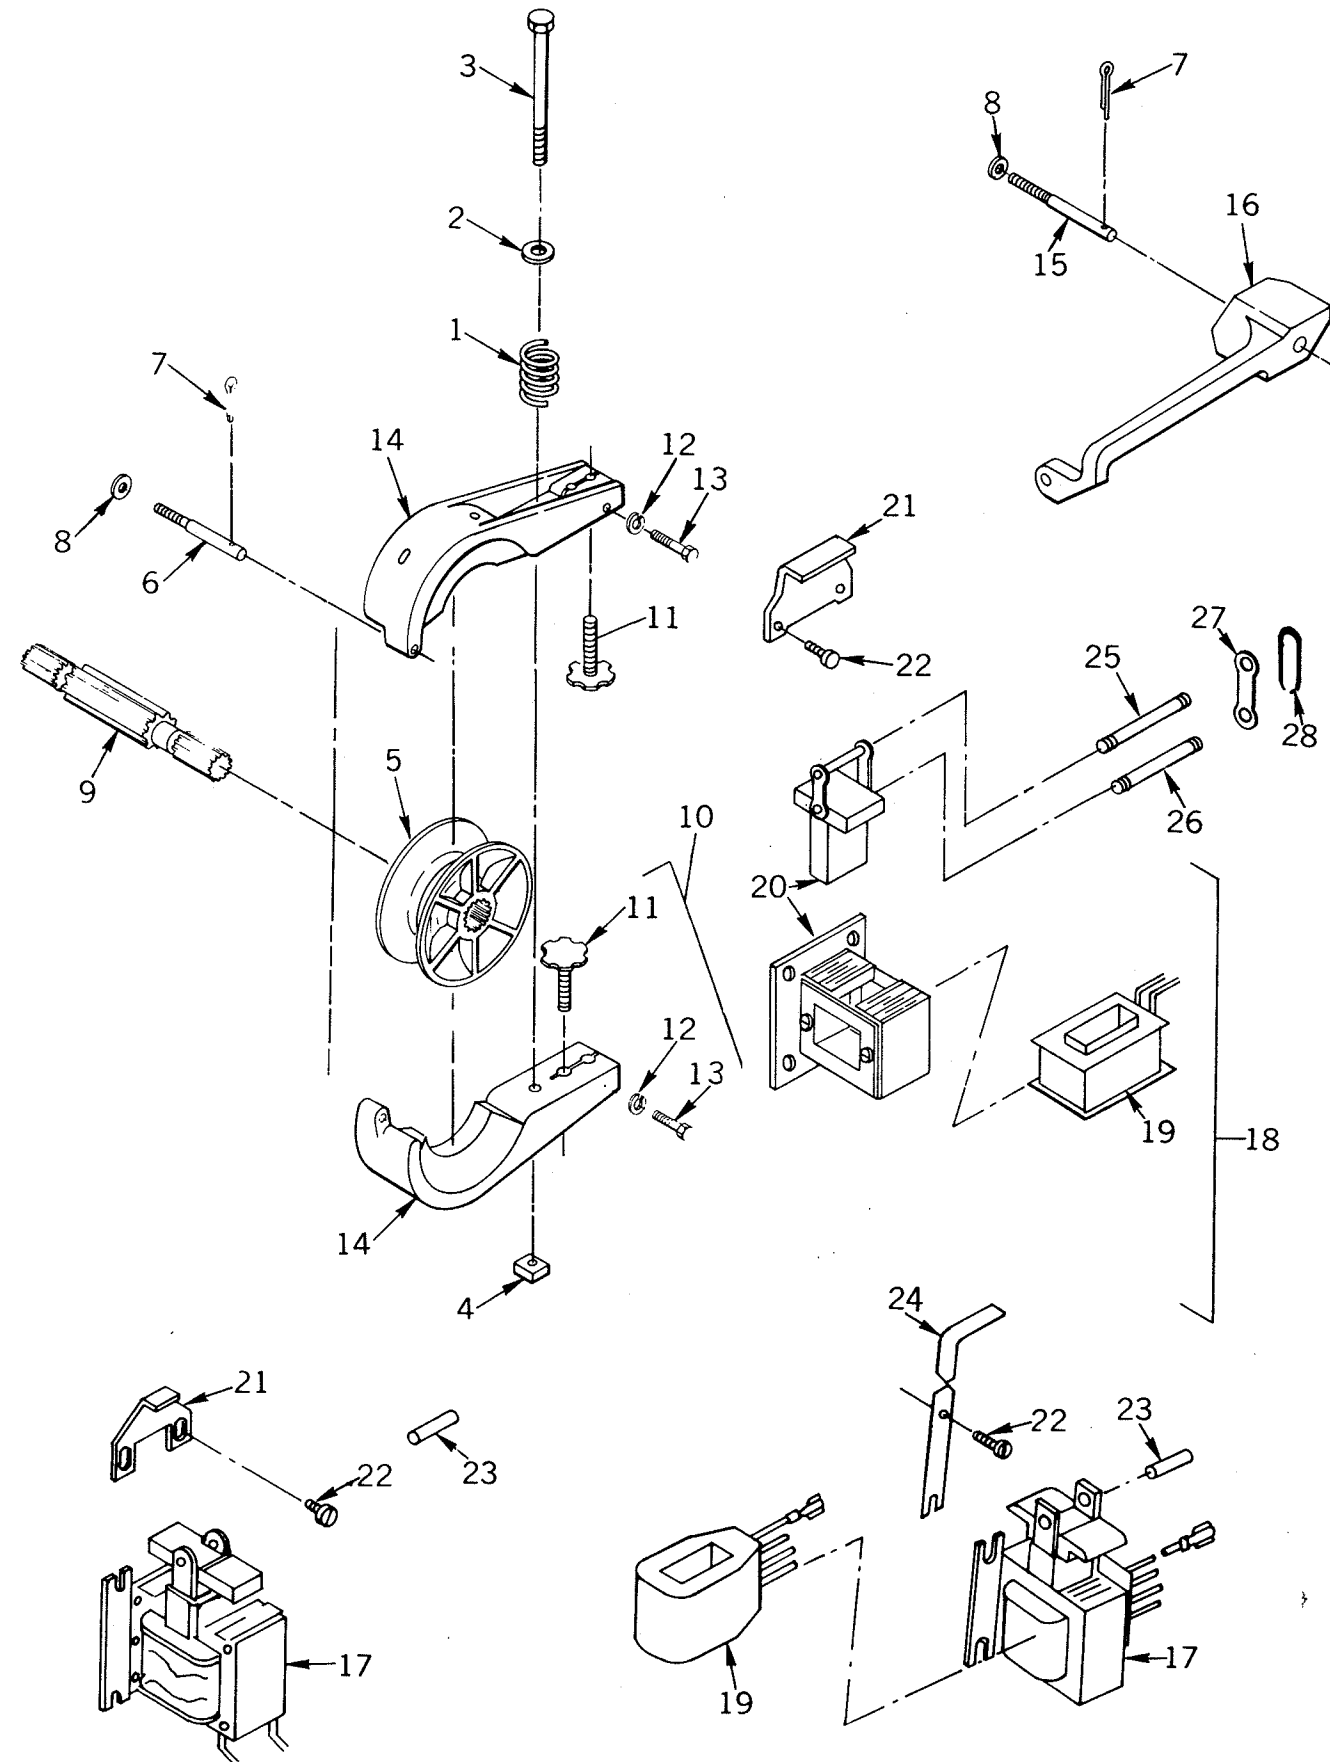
B. BRAKE AND SOLENOID PARTS
